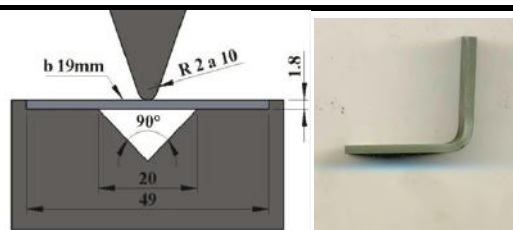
Schematic drawing of the tools for bending of V-sheets and part sheet.
